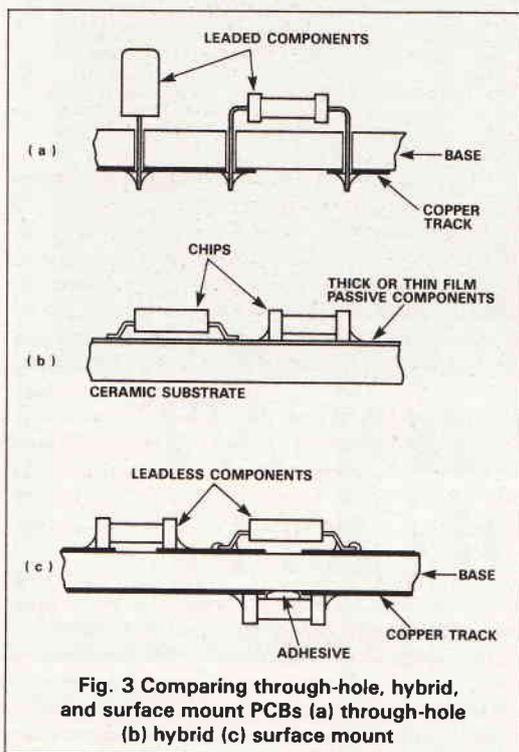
Comparing through-hole, hybrid, and surface mount PCBs (a) through-hole (b) hybrid (c) surface mount
